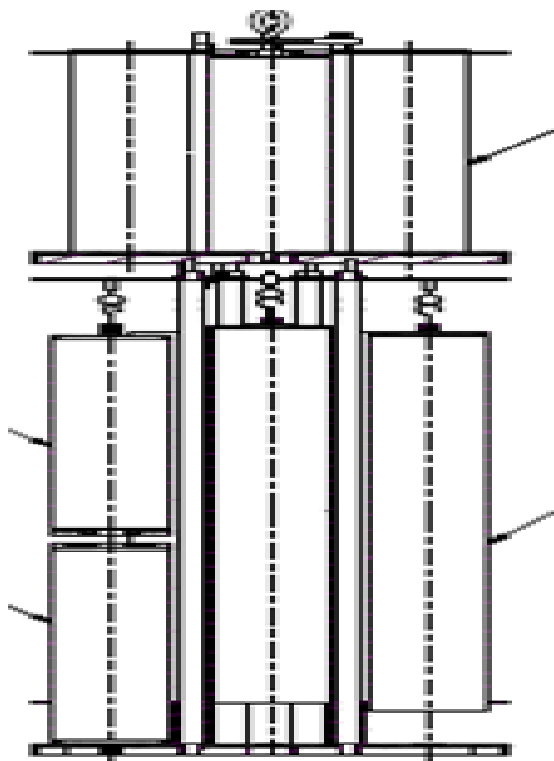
Universal type age hardening fixture accommodating different designs of rotors in multi tired orientation
